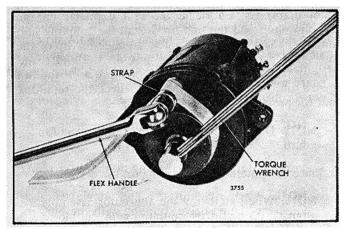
Tighten Generator or Alternator Pulley Retaining Nut
